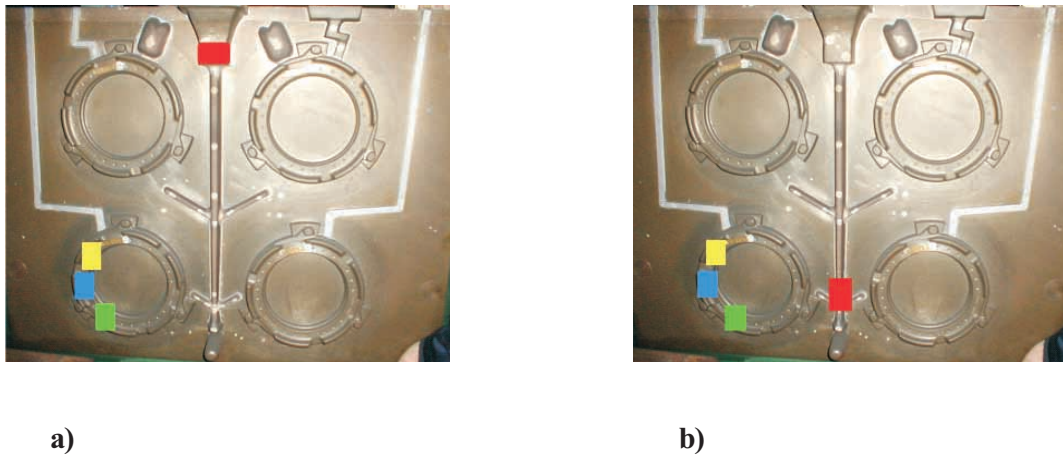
Ring pattern plate with ceramic filter placement in gating system: a) filter settled under pouring basin; b) filter settled close to casting
